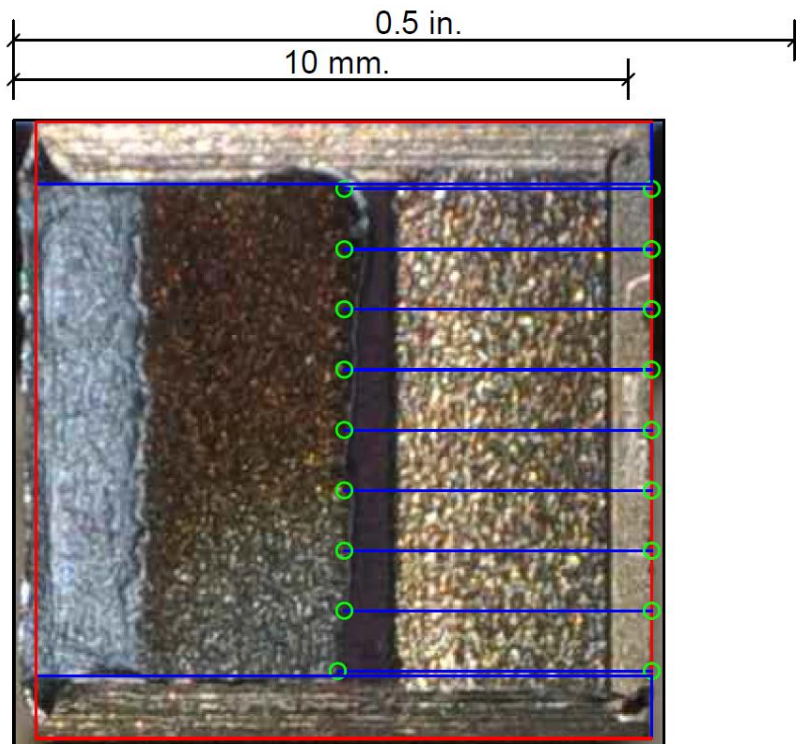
Specimen H7' Fracture Surface
